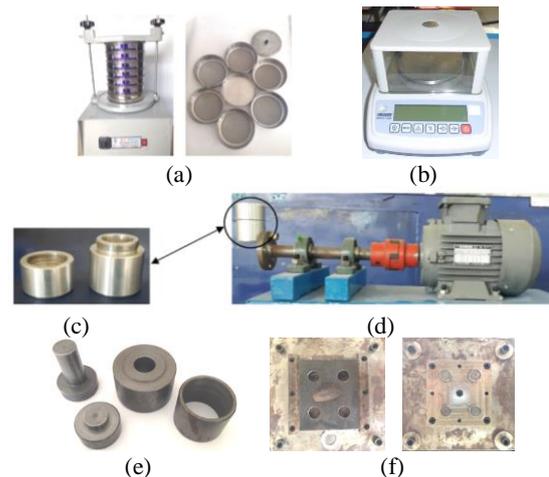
The materials used in the production of specimens (a) the sieve-shaker and sieves (b) the precision scales (c) the powder chamber (d) the powder mixing device (e) the cold press mold (f) the hot press mold
